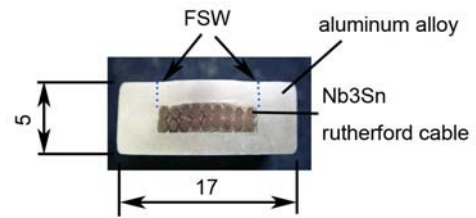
Photo of the cross-section of reduced size 4.7 kA class sample superconductor.
